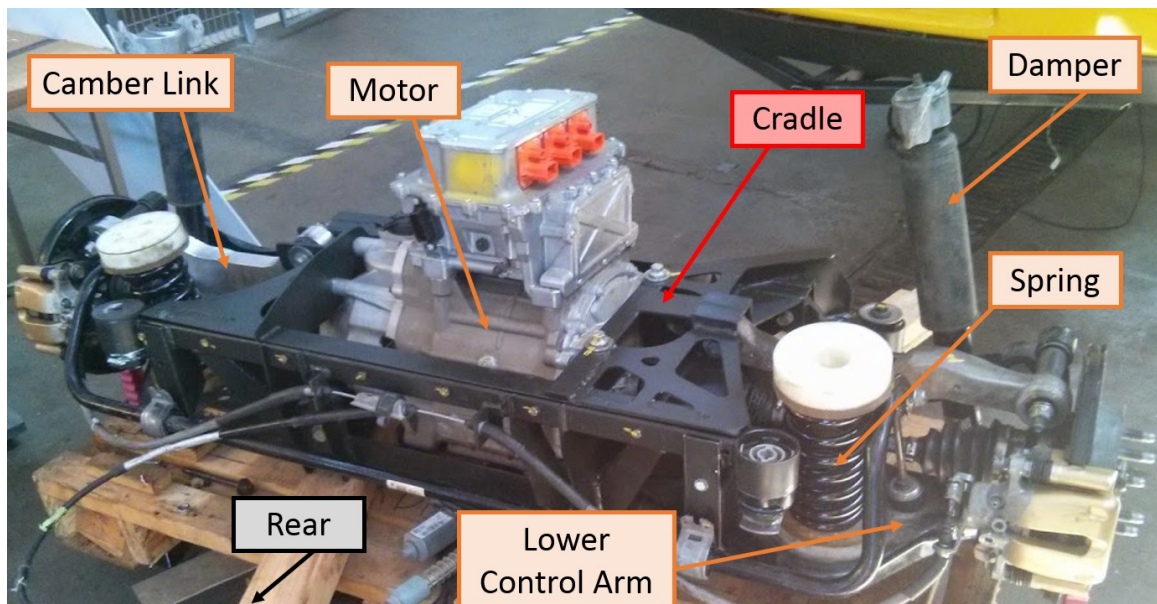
Rear view of rear suspension assembly after fabrication.
